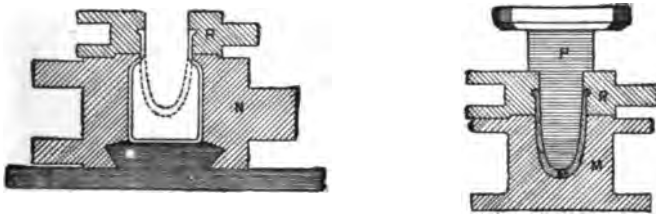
\*—Moulds for Pressing and Blowing a Bottle.
